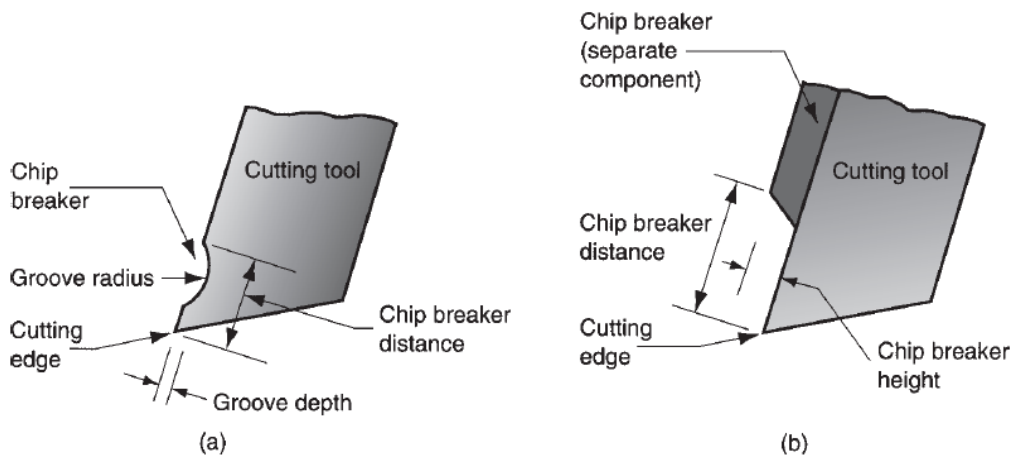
Illustrations of Chip Break Designs for single-point cutting inserts – (a) groove-type and (b) obstruction-type (Groover, 2010)
